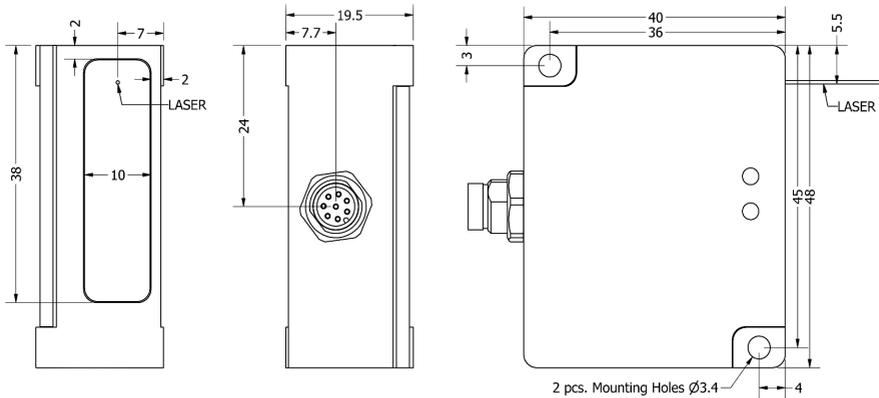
Dimensions, Front, Rear & Upside (M8 connector).
